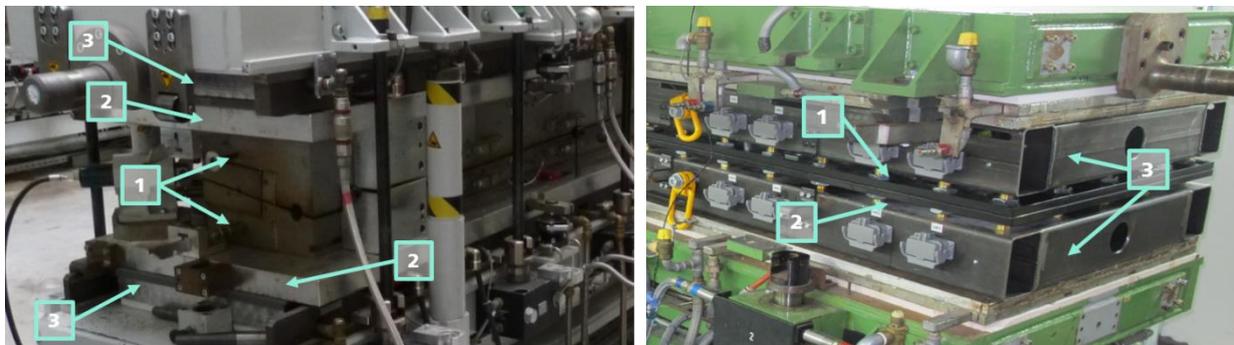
Aluminium tool used for Prepreg technology (1-cavity, 2-heat-/and cooling plate, 3-transportation device) (left); CFRP tool used for RTM technology (1-upper mould, 2-lower mould, 3-steel frame) (right)
